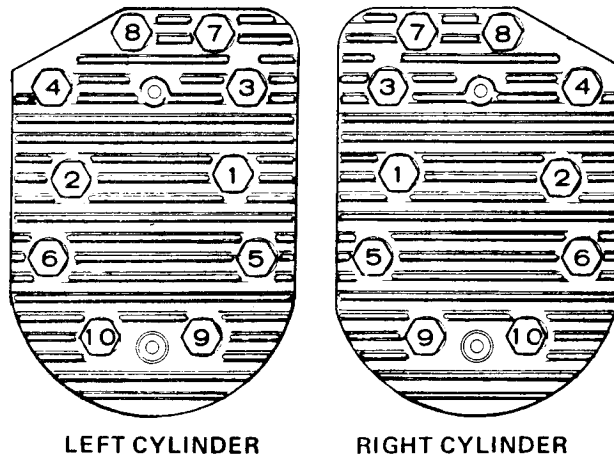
HEAD BOLT TIGHTENING ORDER
